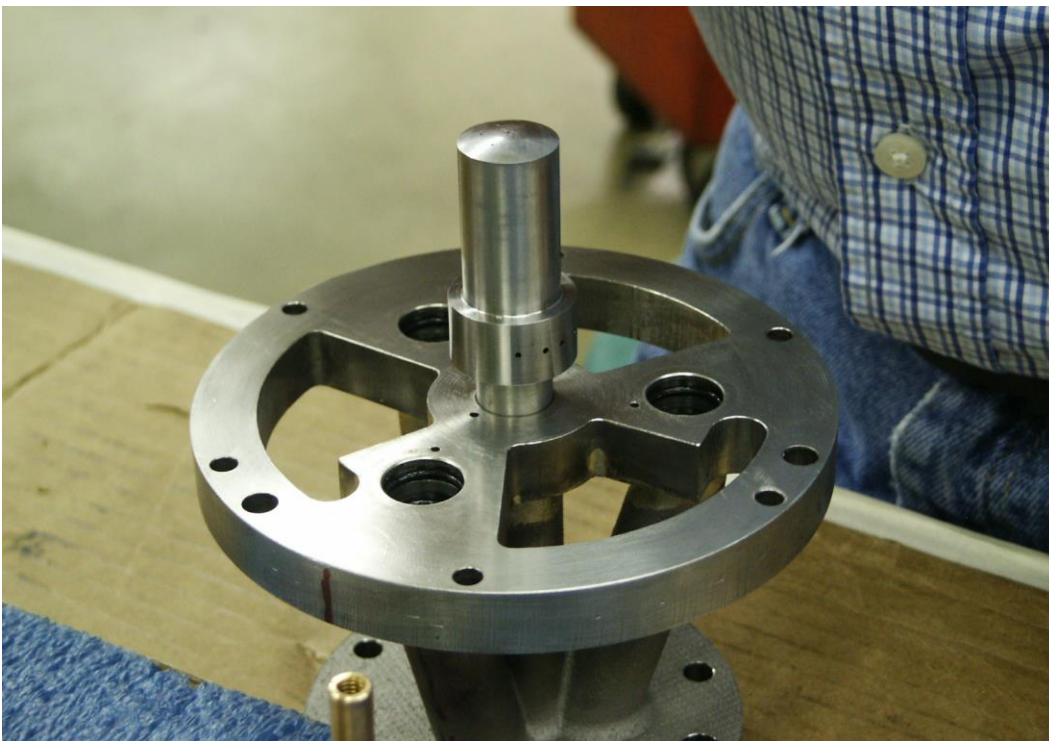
Center plug installation prior to seating the insert past the O-rings.
